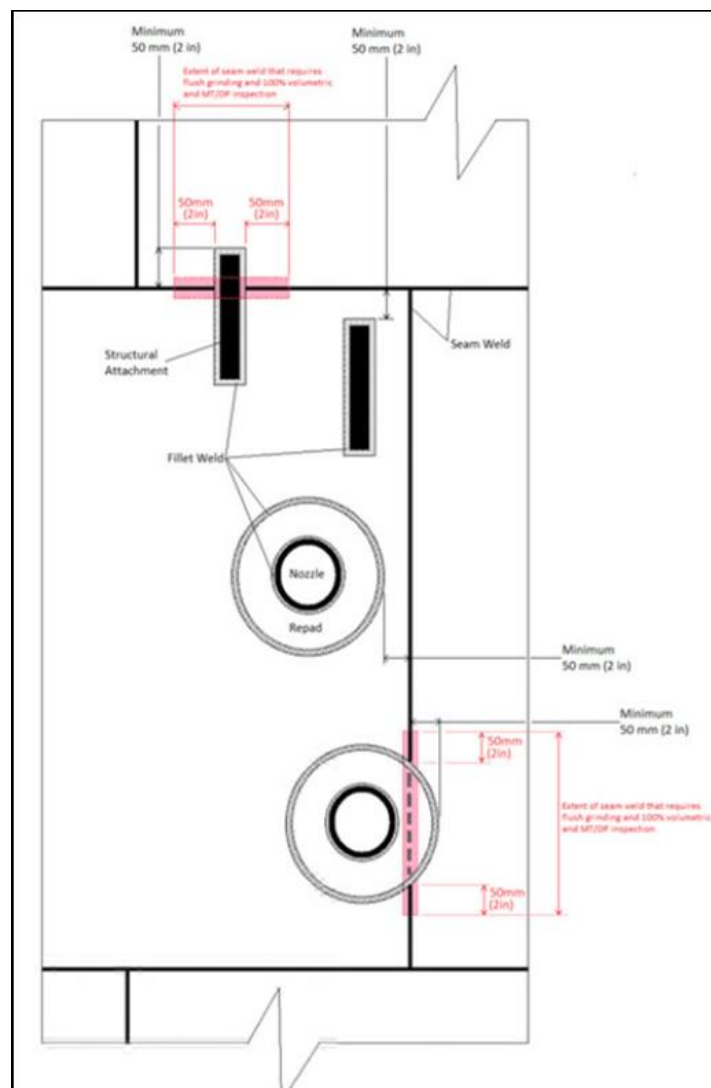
Weld Seams Clearance and Overlapping
